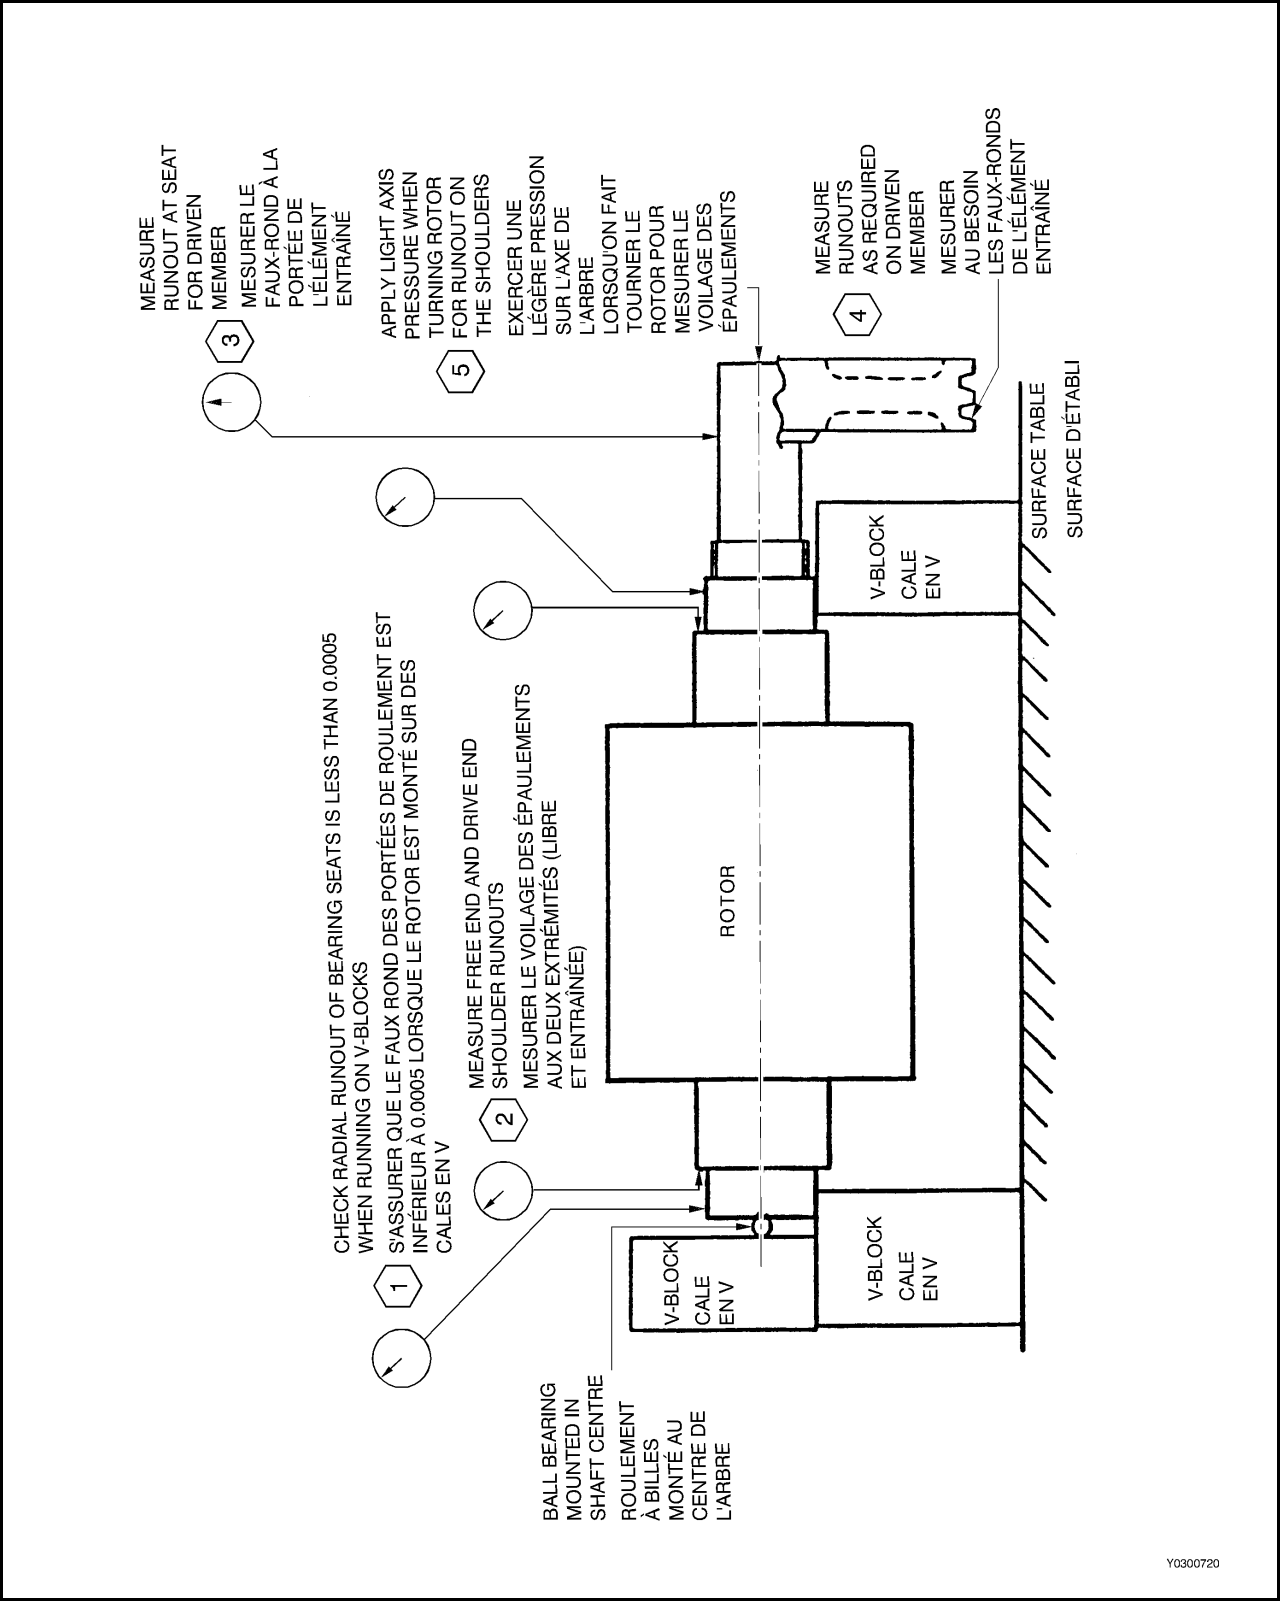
Measurement Location for Determining Shaft Radial Runout of Assembled Motor
